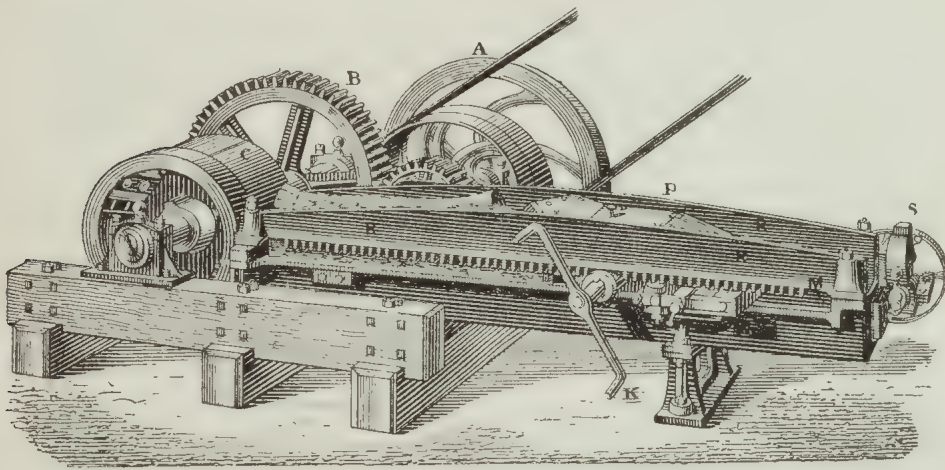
Grinding Machine: C, drum; A, pulley; B, wheel driving drum; R, R, trough for the wood; P, travelling carriage; S, screw which drives the carriage; K, ratchet which brings back the carriage.
